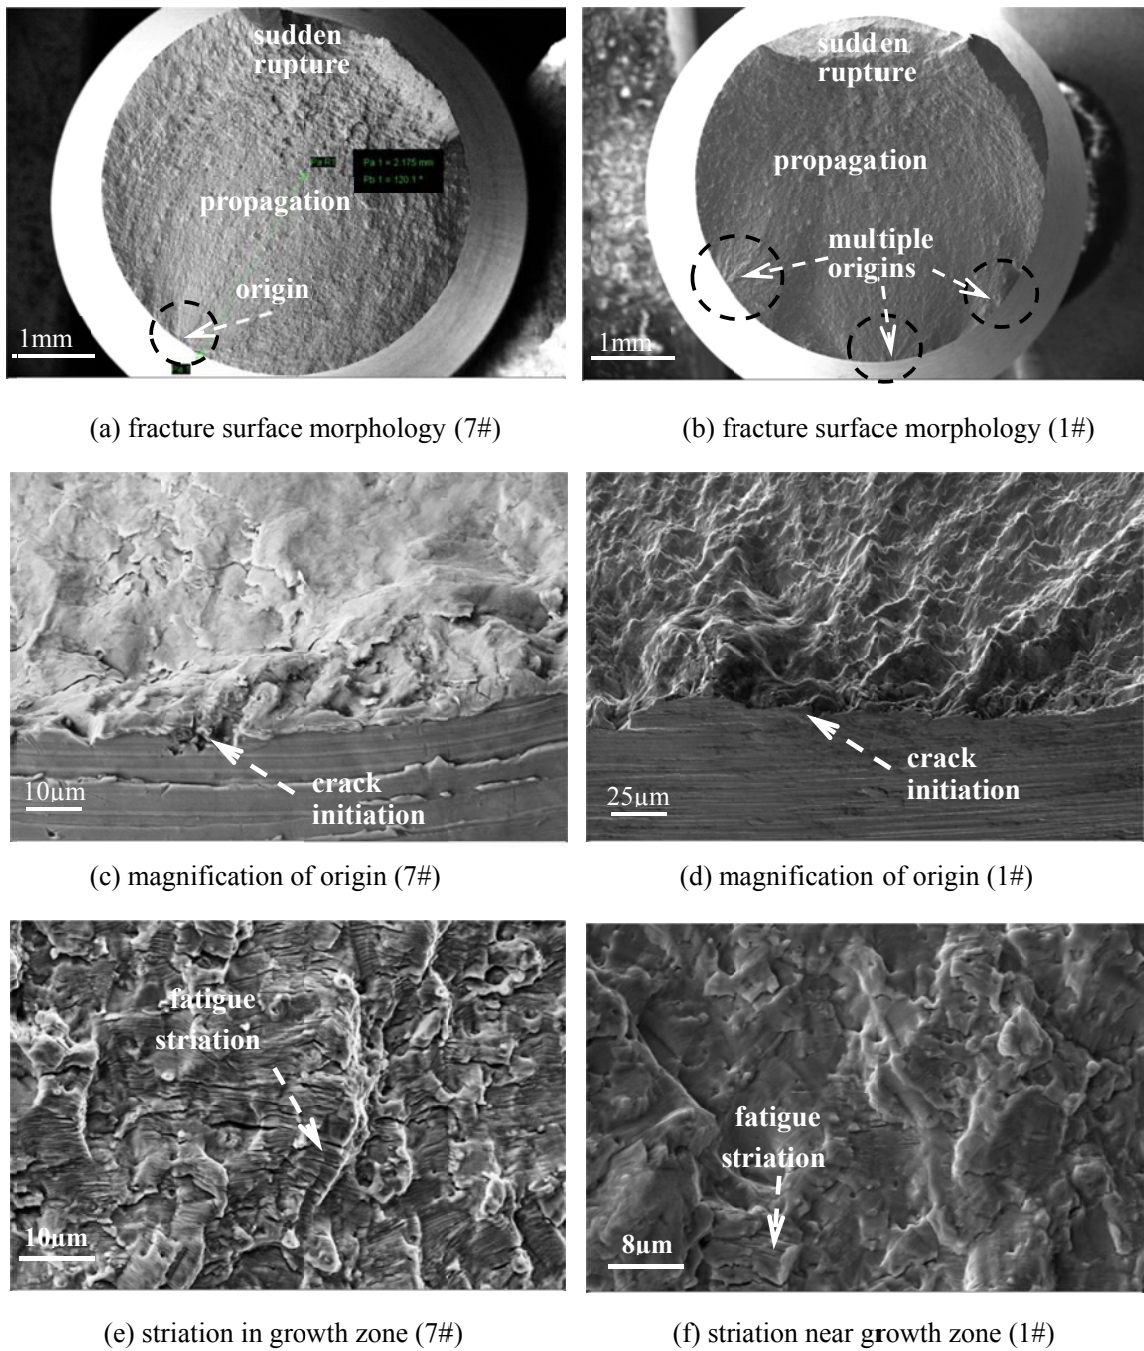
morphology of the fractured areas of GH4169 fatigue specimens 1# and 7#
